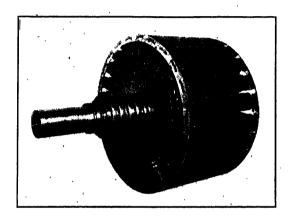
Rotor of a 12/24-Pole, 5000/2500-H. P. 600/300-Rev. per Min. Two-Speed Synchronous Motor
